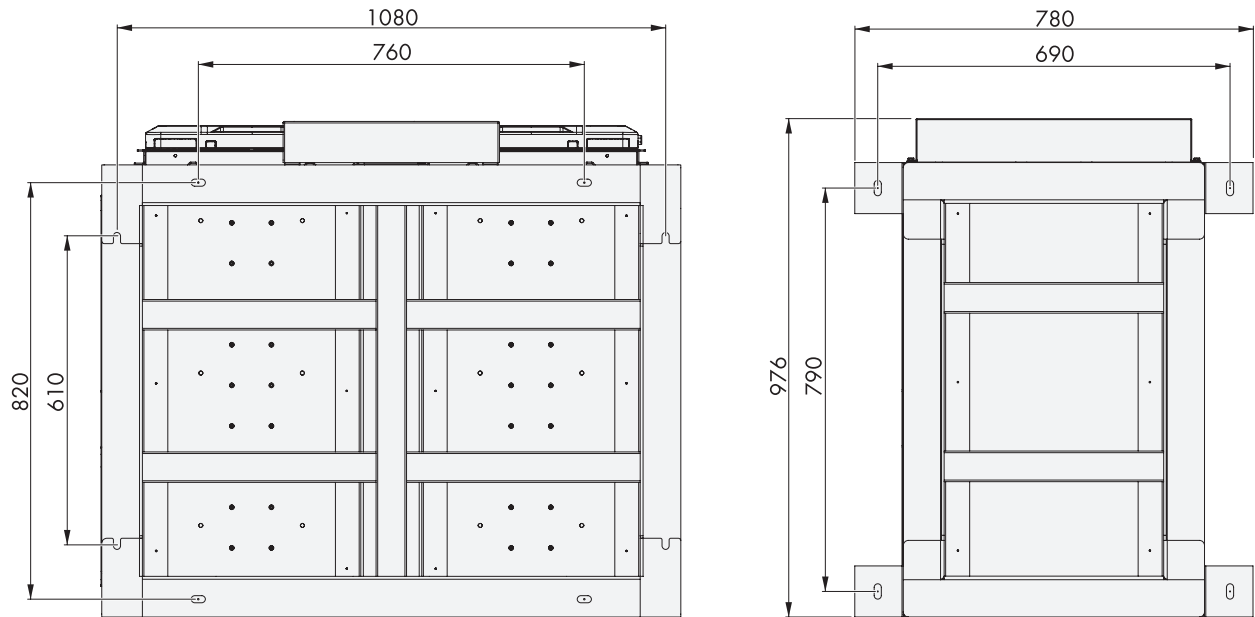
Mounting dimensions on the floor (view from below), left CS-197-IN-30, right CS-89-IN-30 (dimensions in mm)
